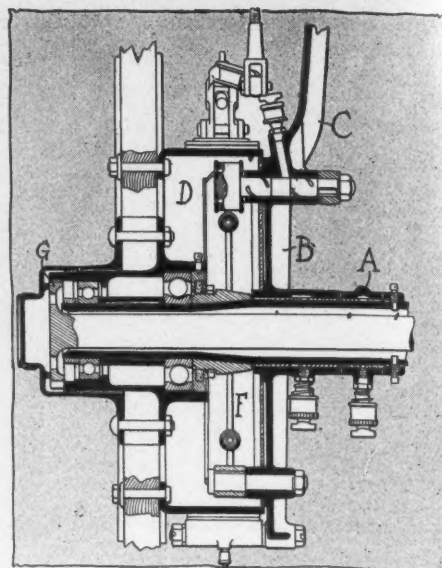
LOCOMOBILE WHEEL BEARINGS
